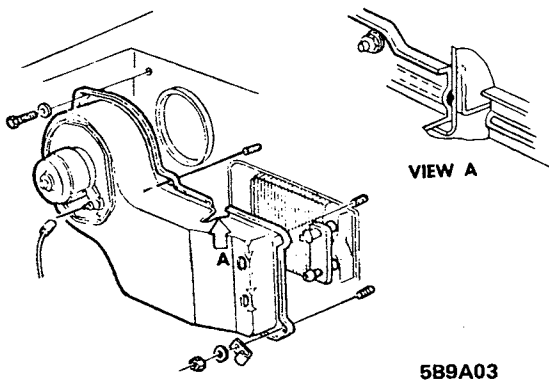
A-7 - Blower Motor - Blower Inlet and Core - H Series
